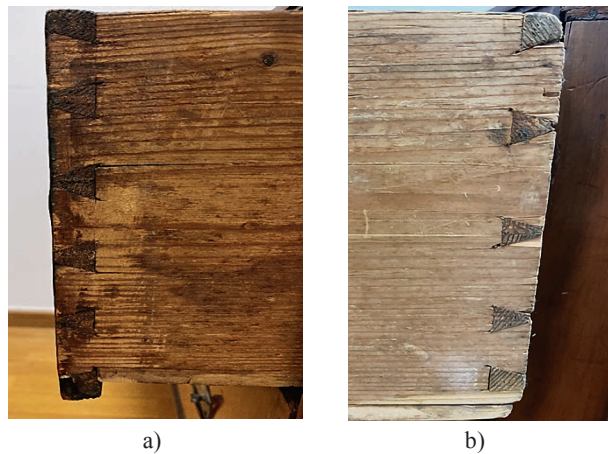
Drawers of a chest: a) drawer front, b) drawer back
